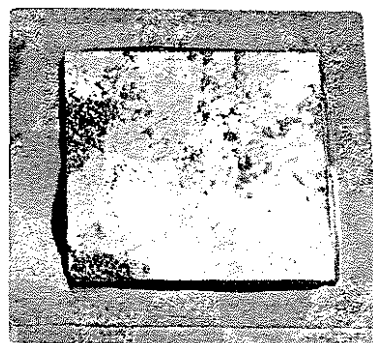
Roll-clad tensile specimen after the tensile test; local fracture surface areas without connection between the aluminium foam and the aluminium cover-sheet
